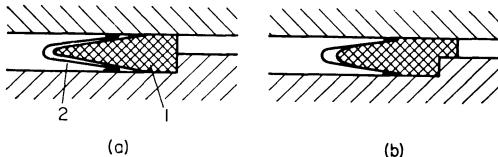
Rubber gasket protected by sheet metal ring (vacuum on left side): (a) uncom-pressed; (b) compressed: (1) rubber; (2) sheet metal
